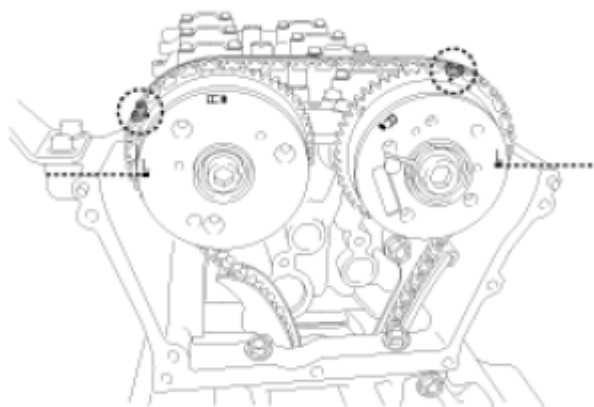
Identifying Timing Mark Of CVVT Sprocket (LH)
